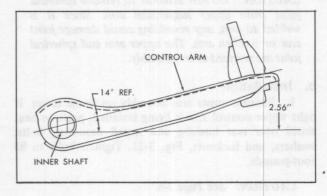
Alignment Of Upper Control Arm And Inner Shaft
